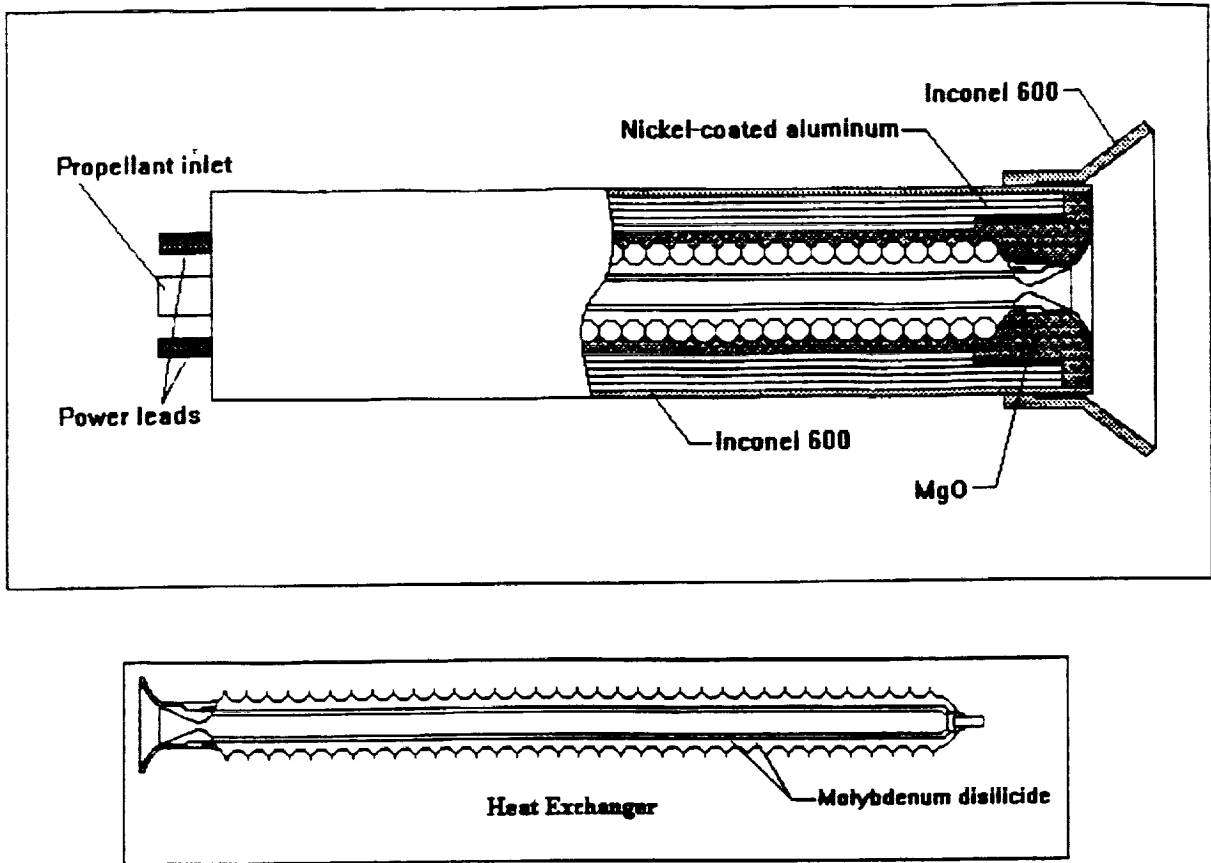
Heater configuration. The system consist of functional elements of a coupled resistive heater coil and heat exchanger. This design is one that was modified by incorporating the MoSi₂ sheath for corrosion resistance.
